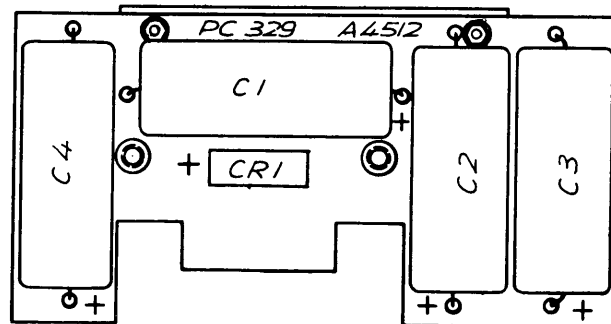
Rectifier and Filter Capacitor Board Z304, Board Component Locations
